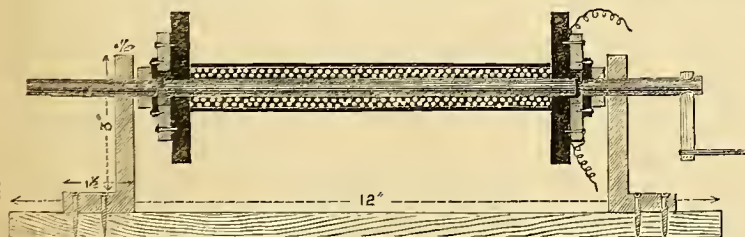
SECTIONAL SKETCH OF COIL-WINDER, SHOWING CONSTRUCTION OF THE APPARATUS, WITH COIL IN POSITION FOR WINDING.
